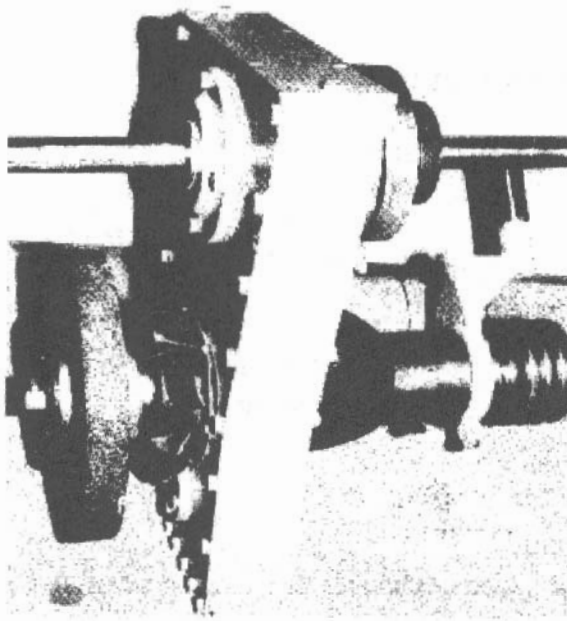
The image of the sub ensemble engendering mechanism of an experimental equipment for the grinding of the exterior polyeccentric surfaces, adaptable on an universal machine of grinding roundly.
